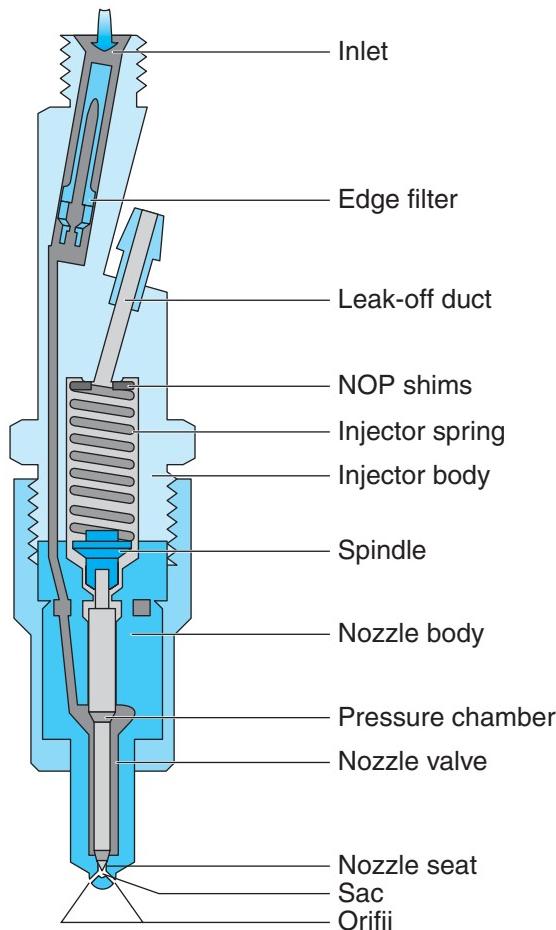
Sectional view of a multi-orifice injector nozzle. (Courtesy of Robert Bosch GmbH, www.bosch-presse.de)
